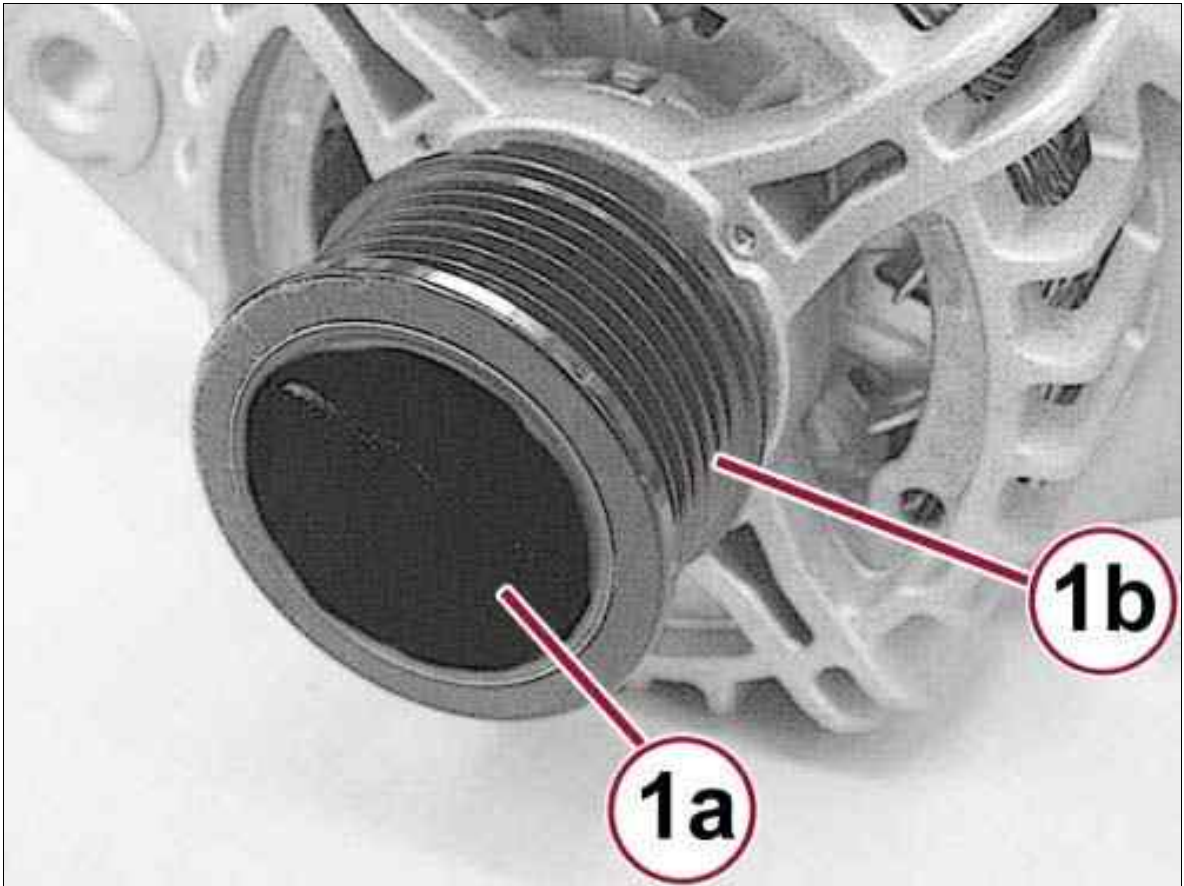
Ribbed Socket, Pulley & Hexagonal Socket
